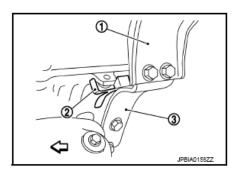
Identifying Engine Slingers And Spacer Courtesy of NISSAN NORTH AMERICA, INC.
